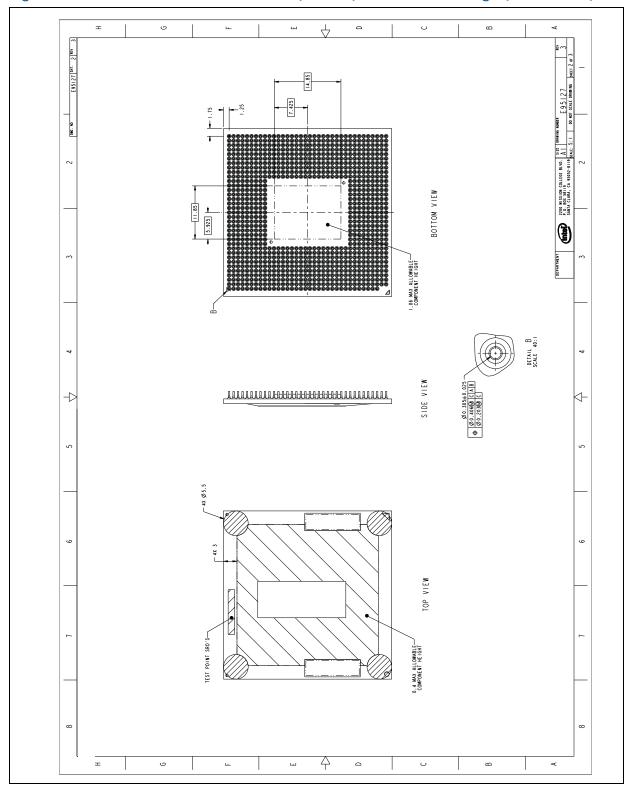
Processor BGA1023 2C/GT1 (G24405) Mechanical Package
